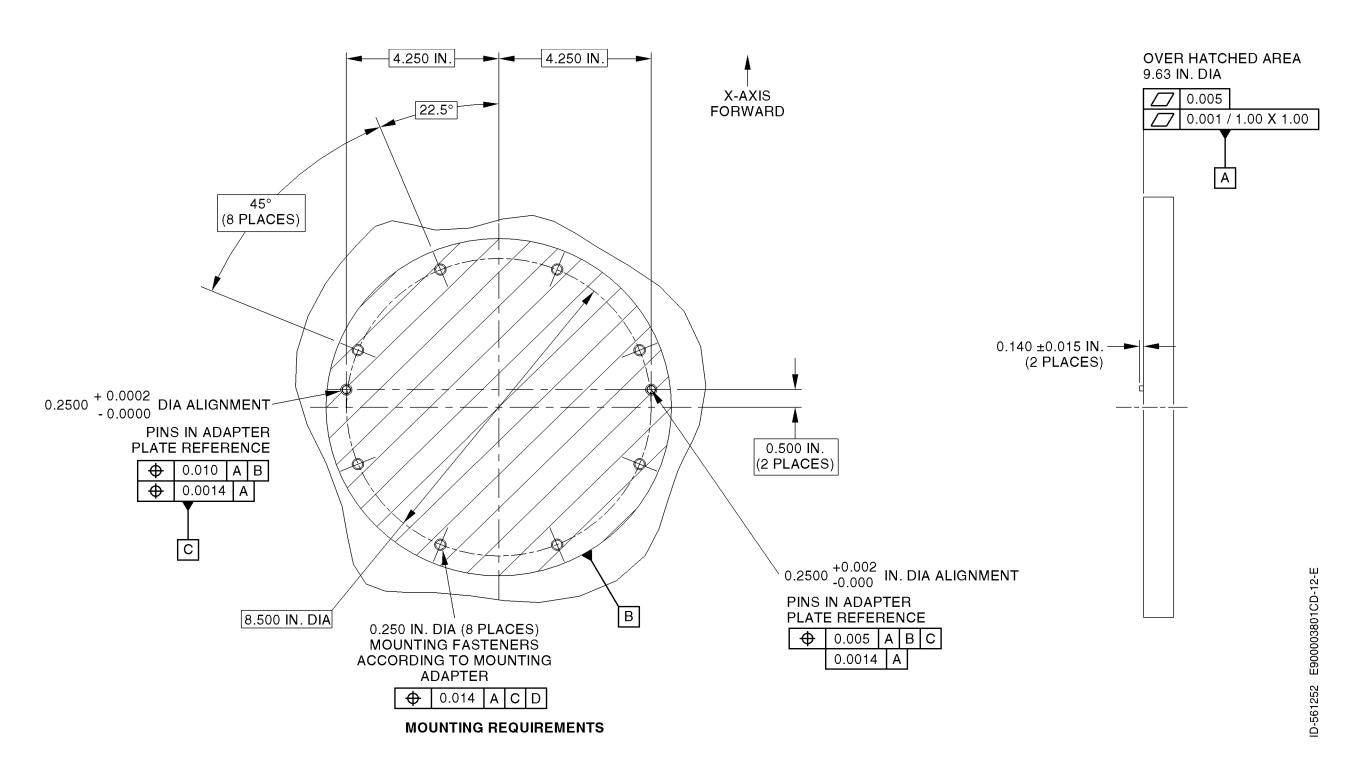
FMA Outline and Installation Drawing (Sheet 12 of 12)
